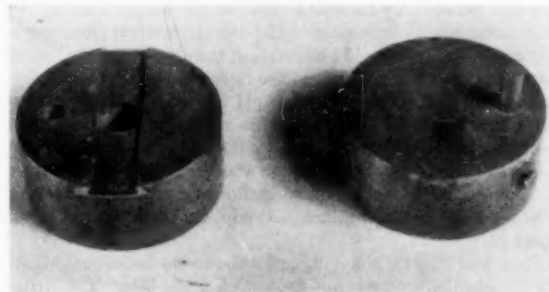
TEST SPECIMEN NO. 1F; CHROMIUM-PLATED CAST CARBON STEEL AFTER 500-HR TEST AT 388 F
